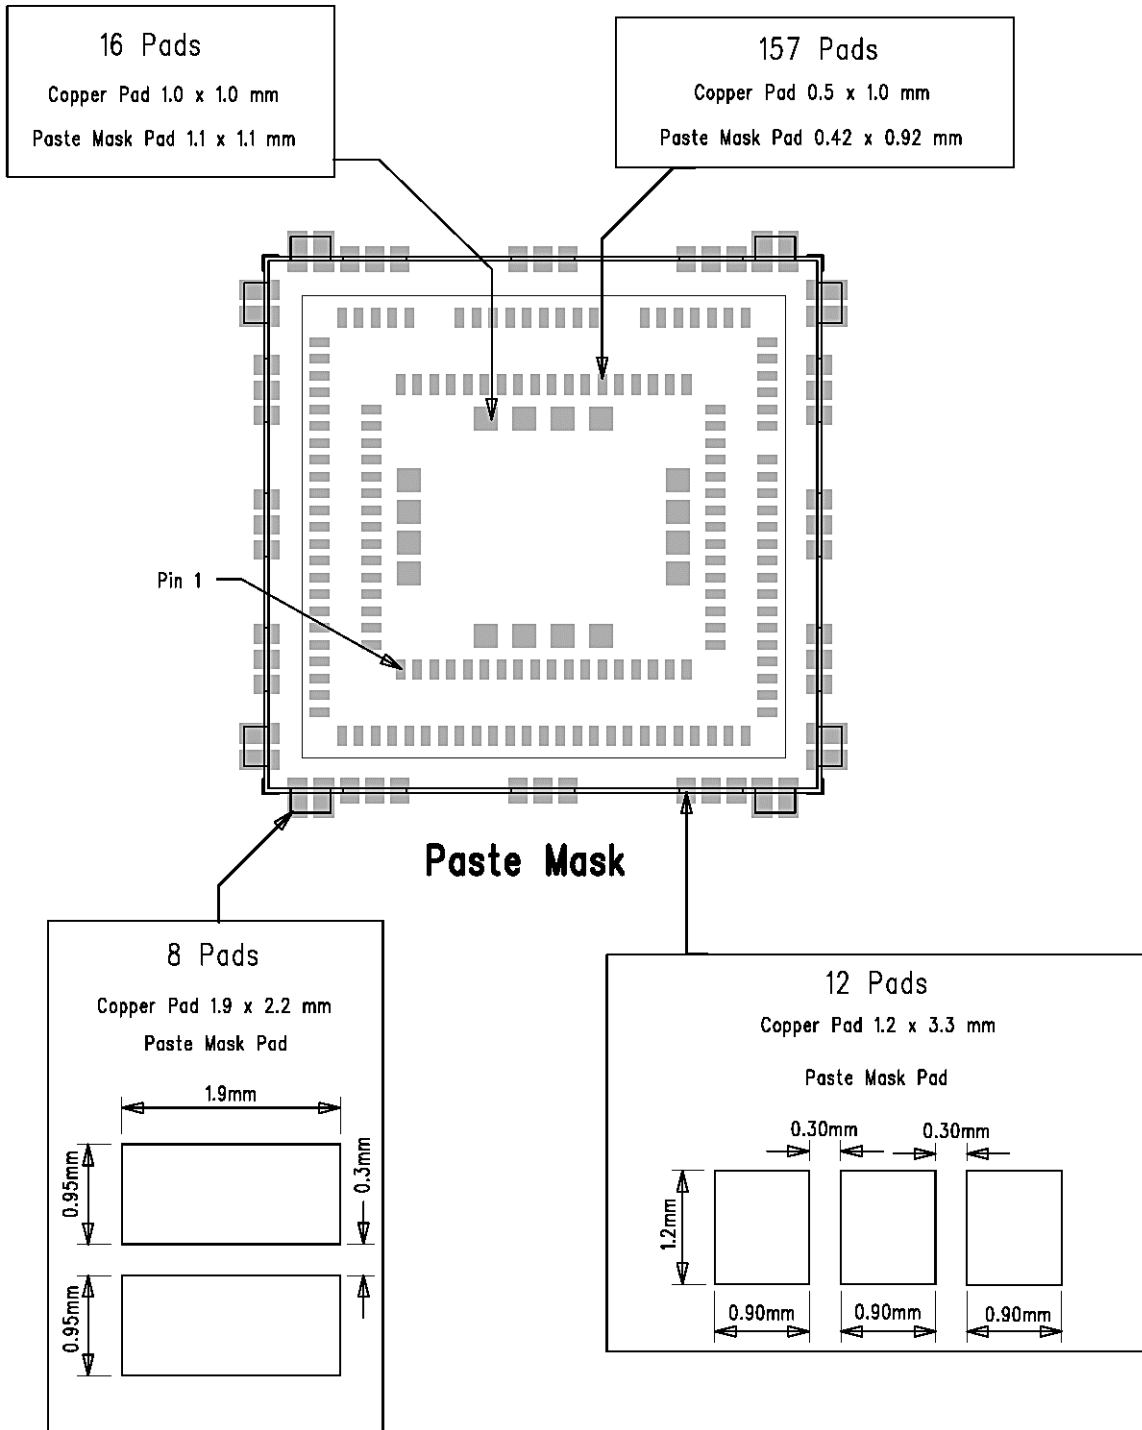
Recommended WP and RC76 Series Snap-in Socket Footprint – Paste Mask Layout
